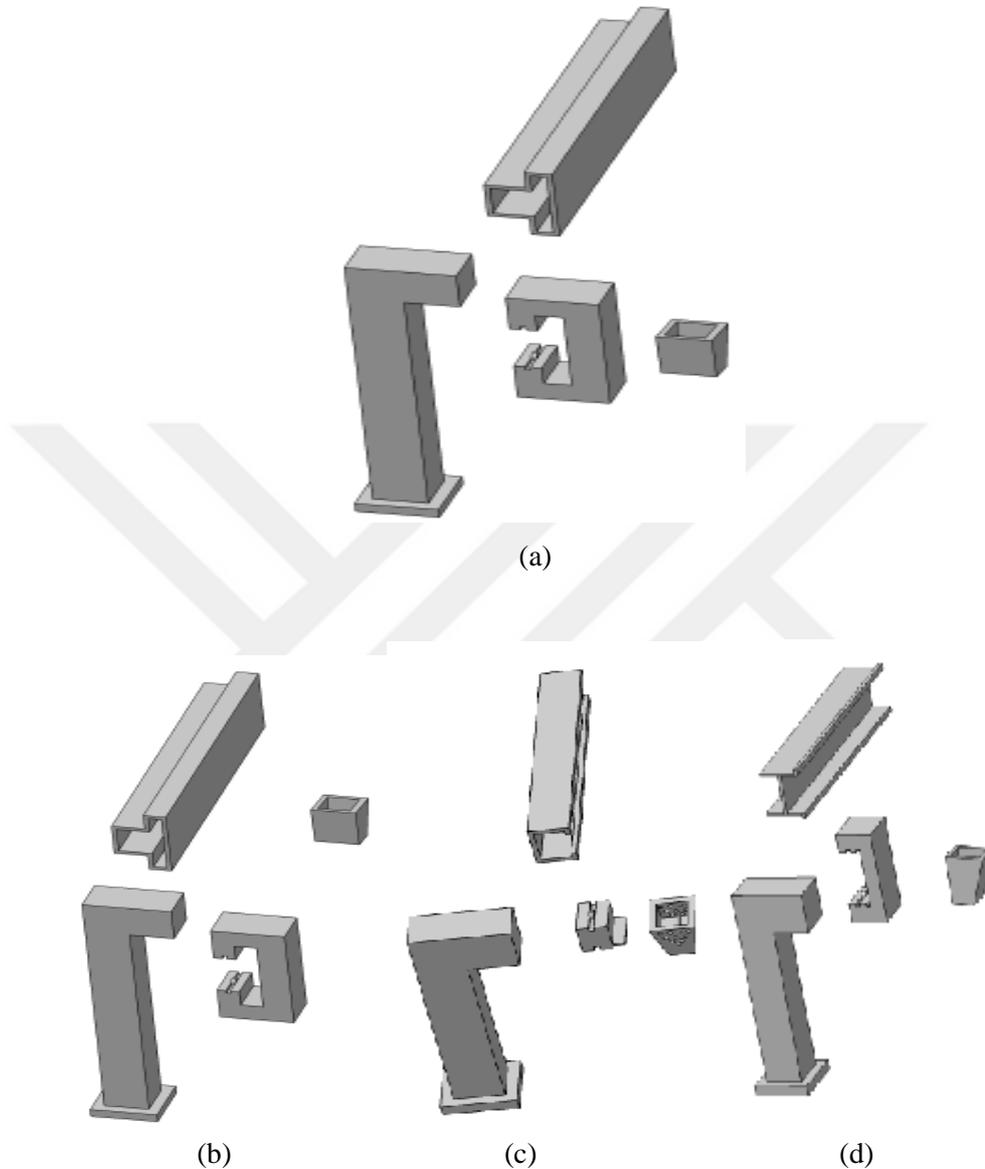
Assembly parts of (a) The best manipulator frame design alternative (b) The second best (number 25 design alternative) (c) The third best (number 4 design alternative) (d) The third best (number 33 design alternative) design alternatives
